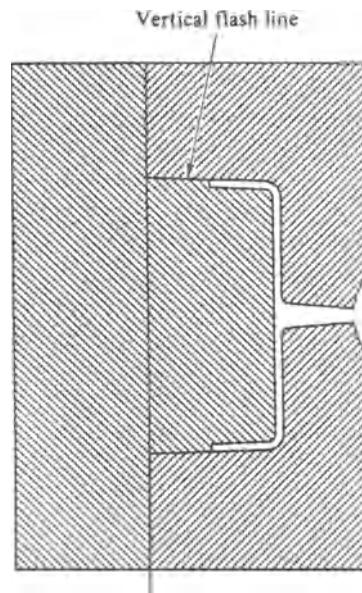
Mold designed with a vertical flash line, typical of a compression mold (also called a positive mold system), where the aligned male and female mold parts meet.
